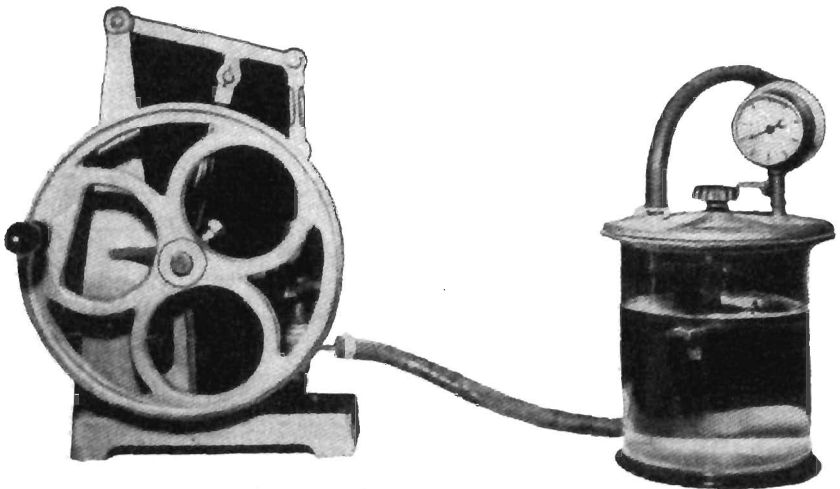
VACUUM CAN TESTER FOR DOUBLE SEAM
